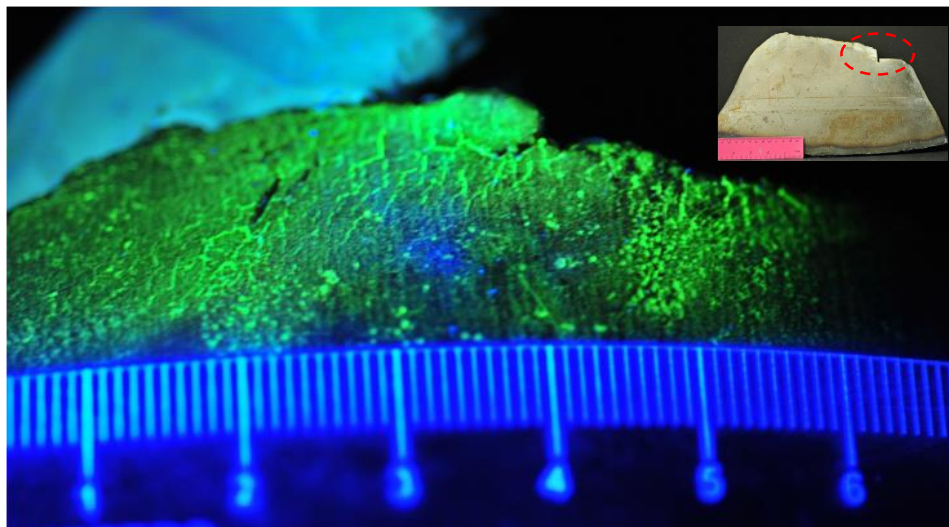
Wet fluorescent magnetic particle inspection revealed multiple cracks oriented perpendicularly to main fracture. Cracks exhibited extensive branching.
